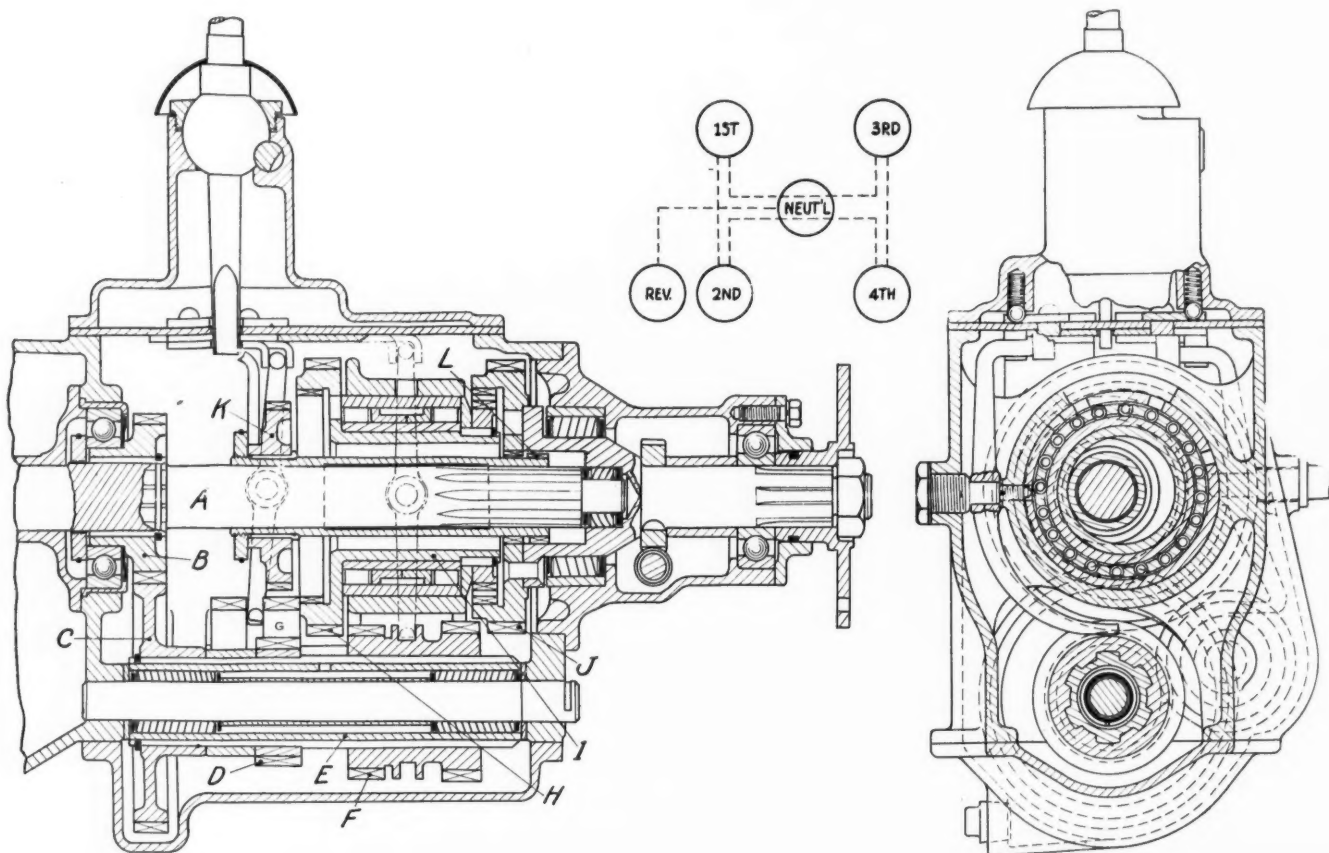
shows all gears in the neutral position. It will be noticed that in this design the internal gears
